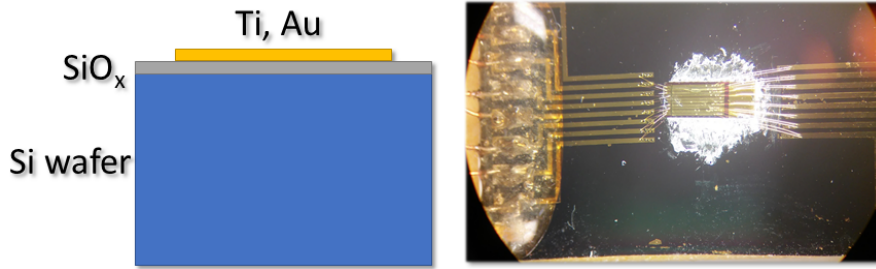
Silicon circuit board: schematic cross section (left), mounted, wire-bonded and soldered (right).
